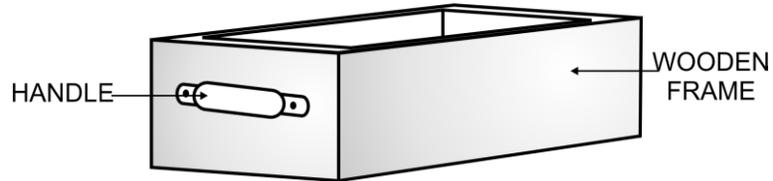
A wooden frame used brick moulding (Adelabu et al. 2007)
